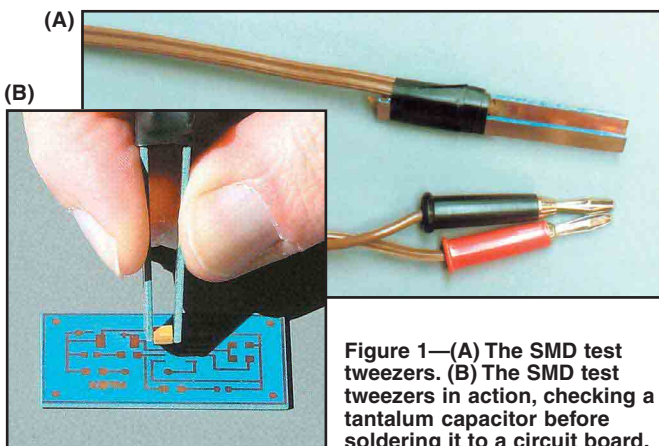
(A) The SMD test tweezers. (B) The SMD test tweezers in action, checking a tantalum capacitor before soldering it to a circuit board.
